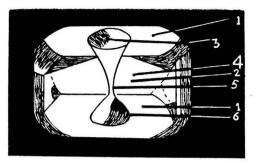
PERSPECTIVE VIEW OF A PREPARED DIAMOND SHOWING THE PROFILE OF THE DRILLED HOLE: (1) DRILLING FACES, (2) VIEWING FACES, (3) ENTRANCE TO THE DIE, (4) APPROACH TO THE BEARING OF THE DIE, (5) BEARING OF THE DIE AND (6) EXIT OF THE DIE.
